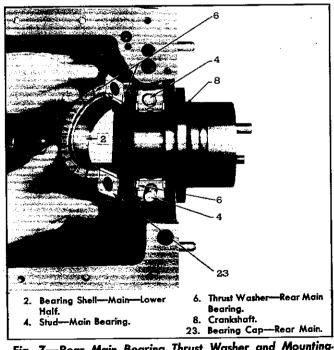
Rear Main Bearing Thrust Washer and Mounting.
